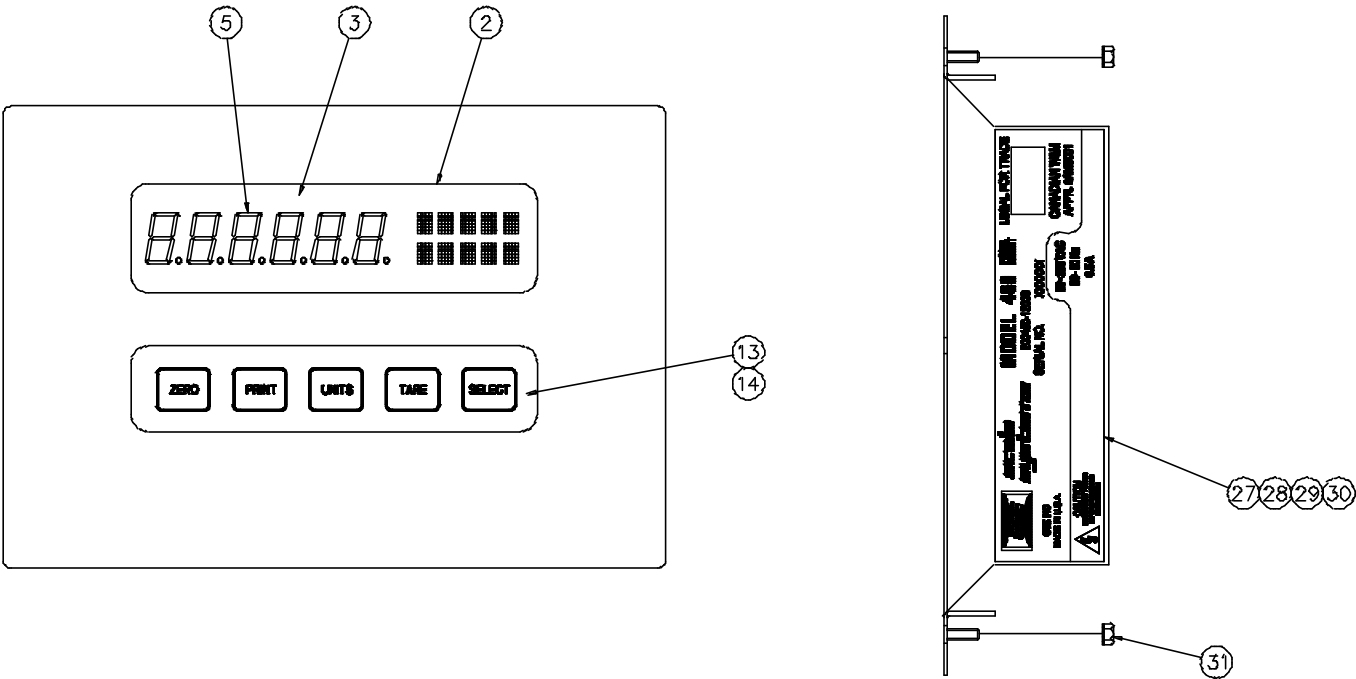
Front/Side enclosure views of M450 *panel mount* version (*internal power*)
